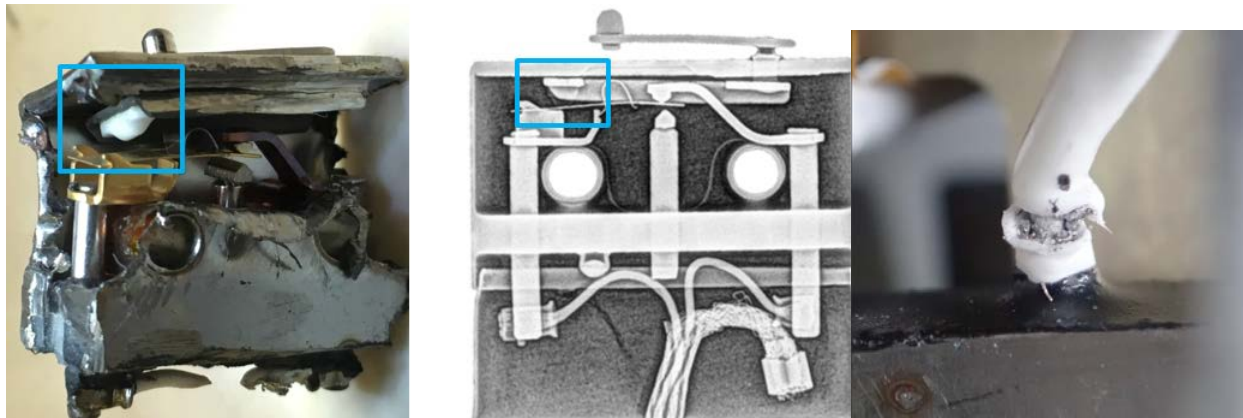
Fracture of Ceramic Contact Pin in Shock (left) and undamaged switch (center); harness damage (right)
